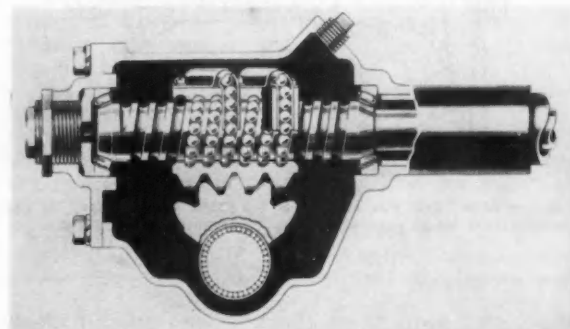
Saginaw "circulating-ball" steering gear, introduced as World War II broke out, is basically a screw-and-nut type gear with addition of antifriction balls between the thread grooves of the screw and nut.
